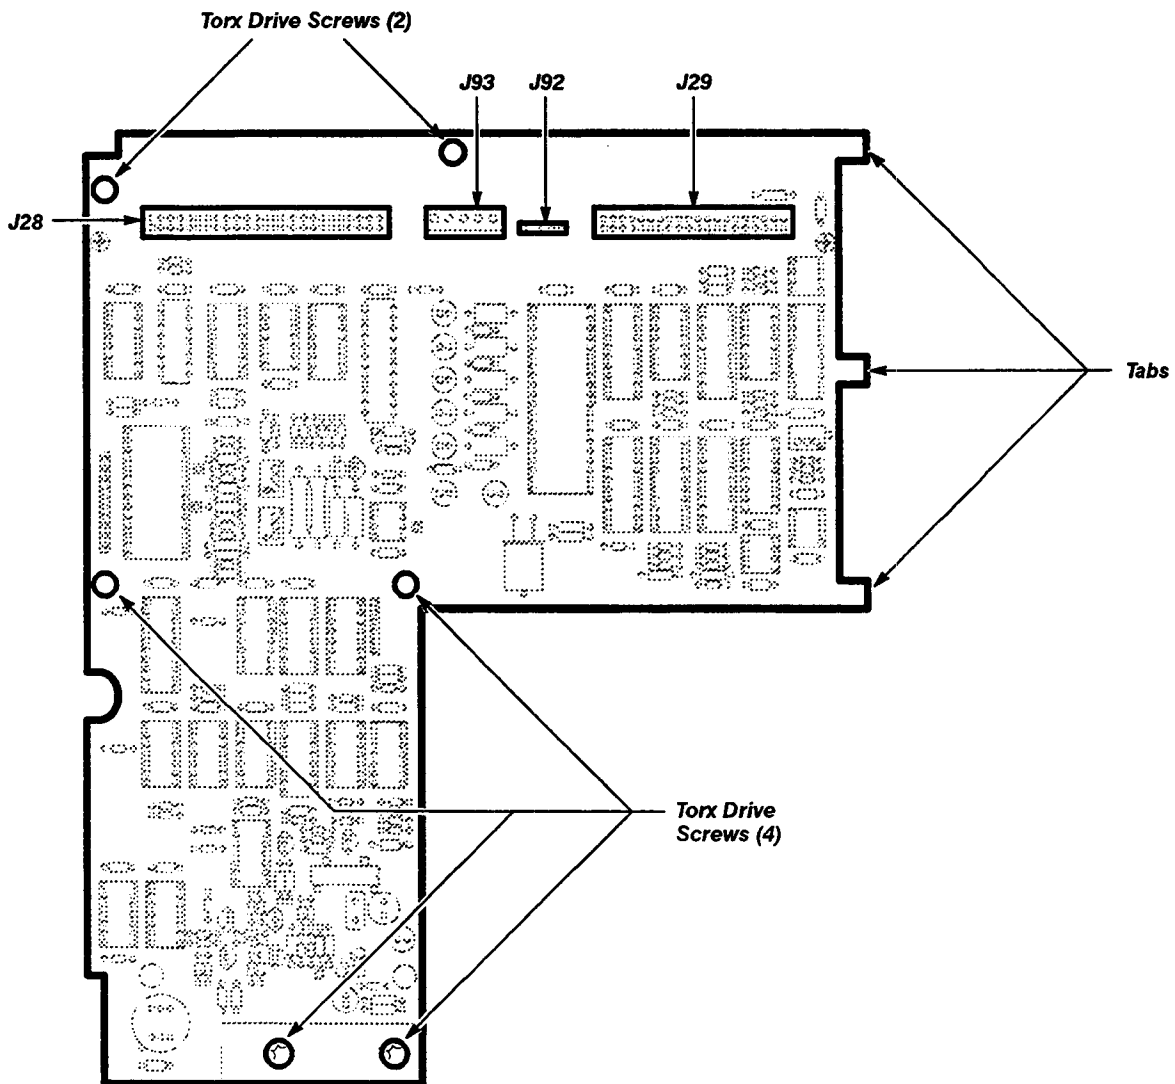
Removing/Replacing the A5 Calibrator Board
